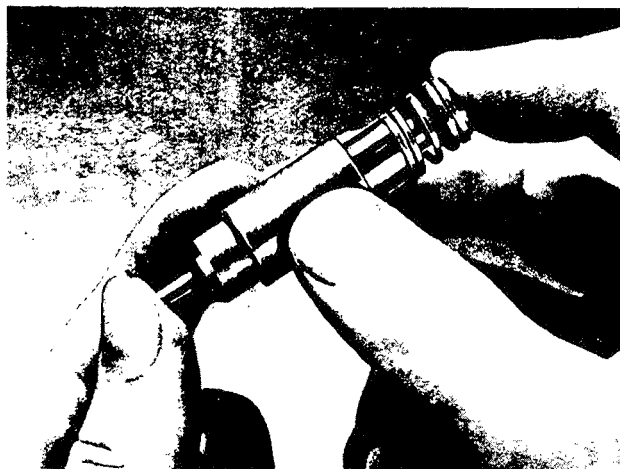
TESTING ACTION OF CHECK VALVE.
